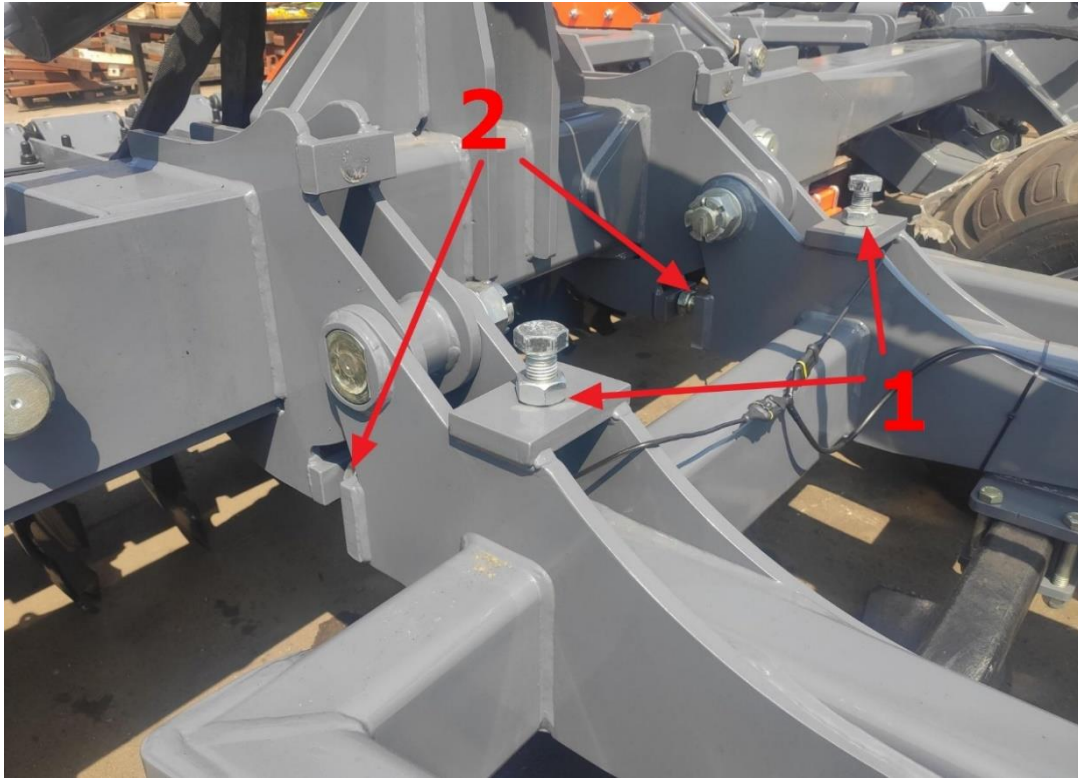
Placement of machine wing adjustment screws in position when: 1-Machine wings are folded, 2-Machine wings are unfolded.
